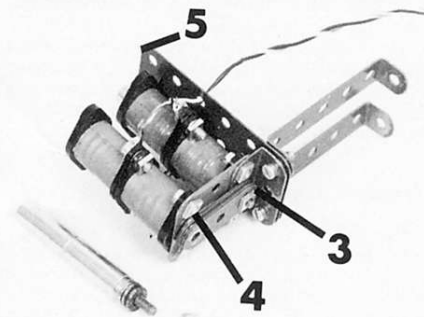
The built-up electromagnets, with one core removed to show construction.
